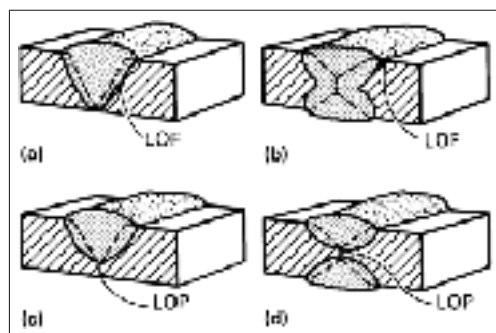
Lack of fusion in a single-V-groove and double-V-groove weld joints and lack of penetration in a single-V-groove and double-V-groove weld joints are represented in (a), (b), (c) and (d) respectively.
